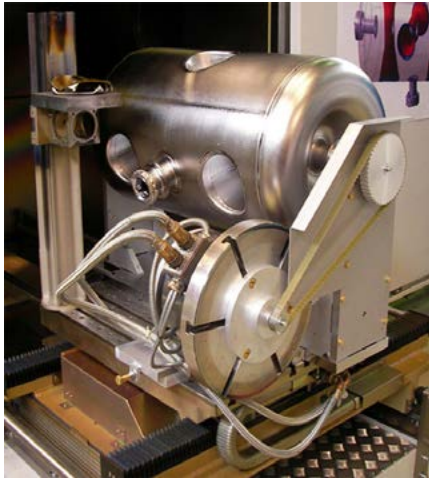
Example of using a welding positioner during electron beam welding of a girth weld in a container made of 4 mm thick RR300 niobium alloy [12]
